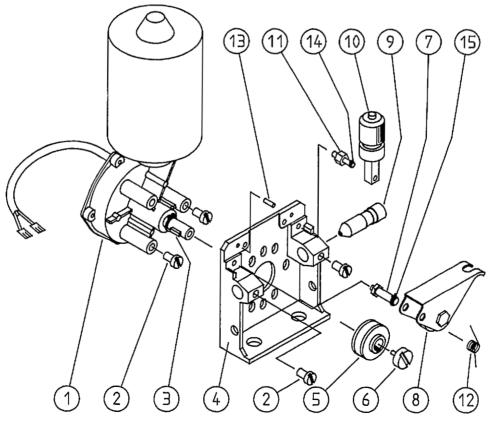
W27-1 TWO ROLL DRIVE ASSEMBLY
